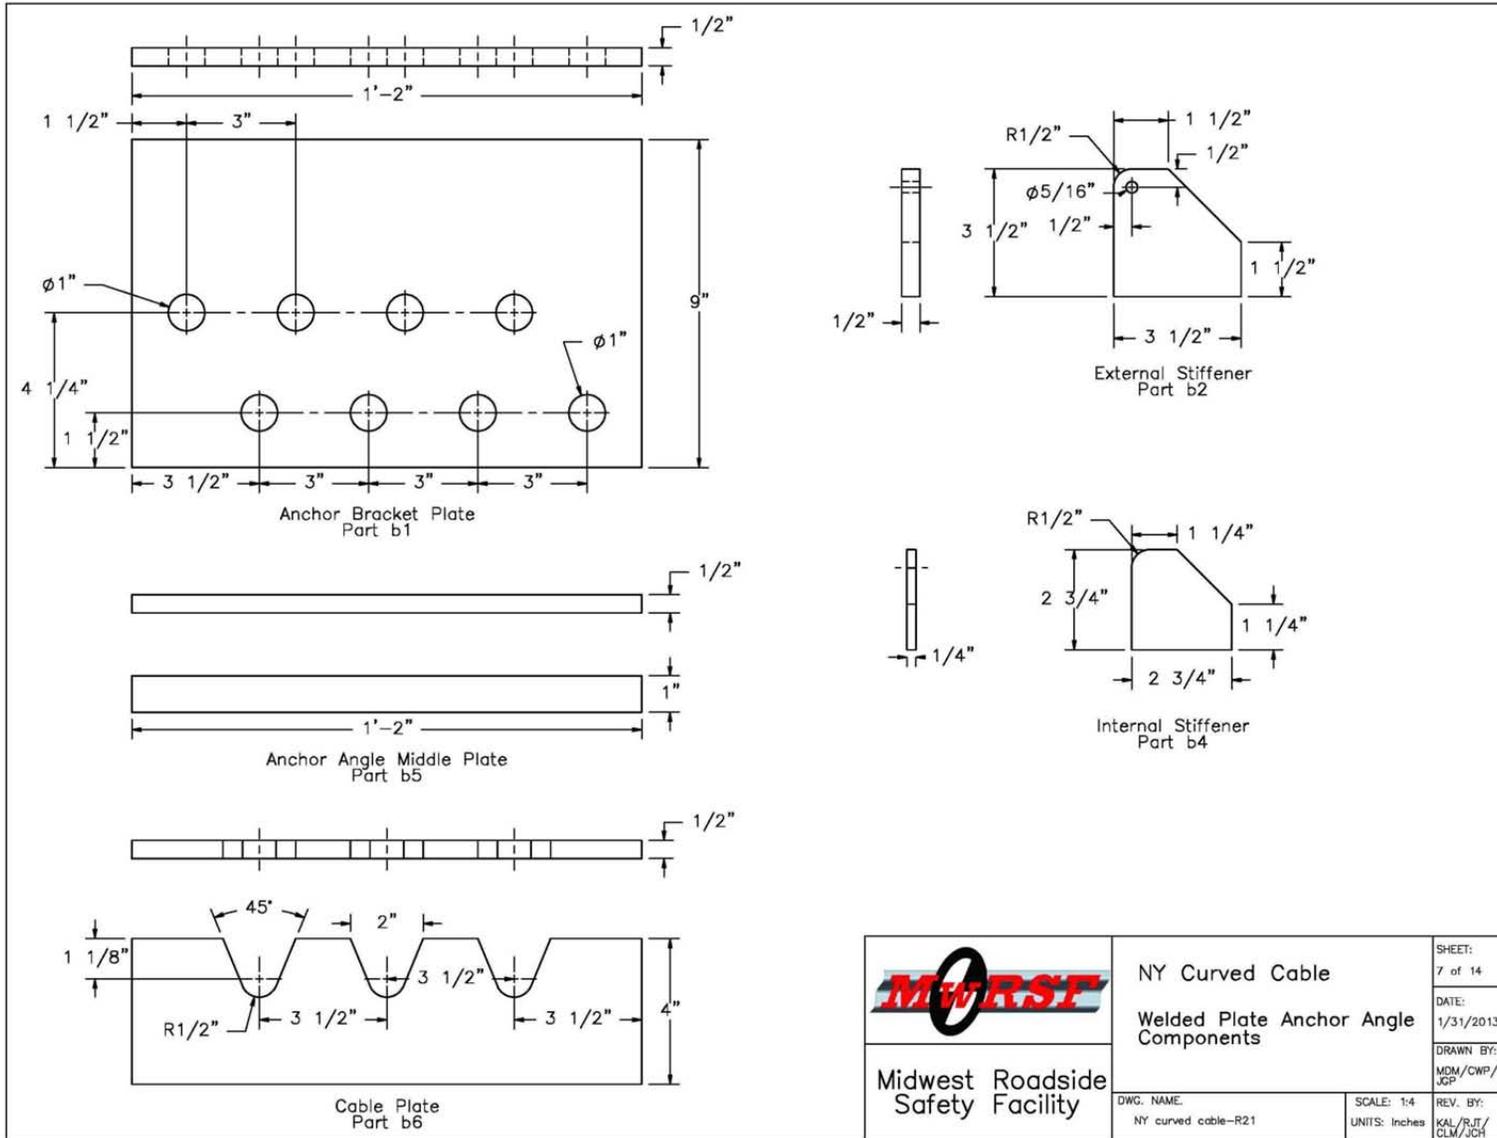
Cable Anchor Bracket Component Details, Test No. NYCC-1
